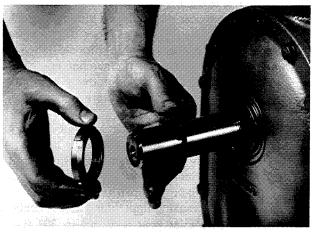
ASSEMBLING SPIDER WASHER AND LOCK NUT TO DRIVE SHAFT
